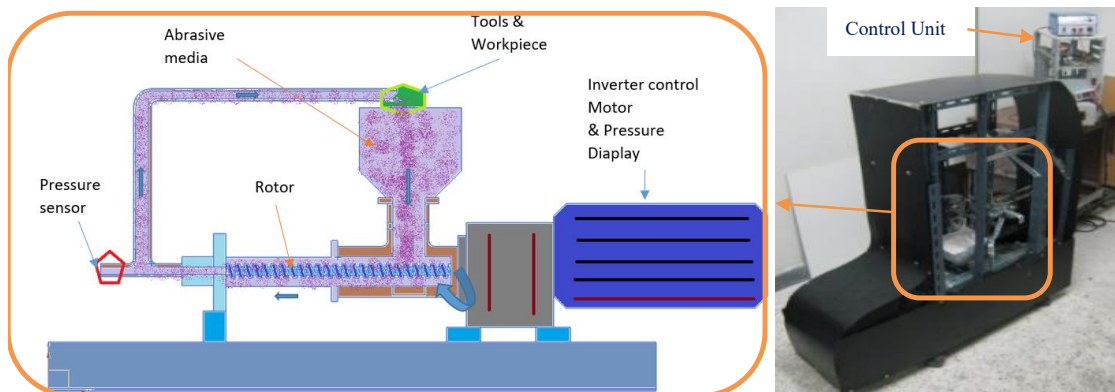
Tools and Equipment of the one-way rotor AFM prototype.
